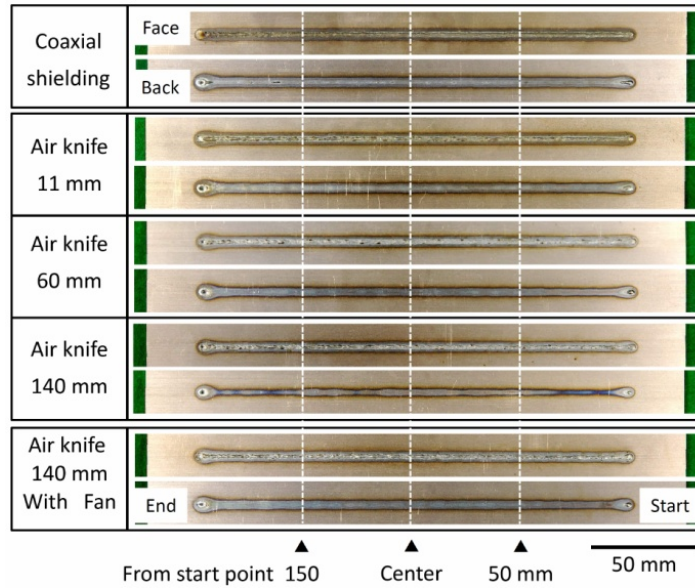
Photos of laser weld bead appearances.
